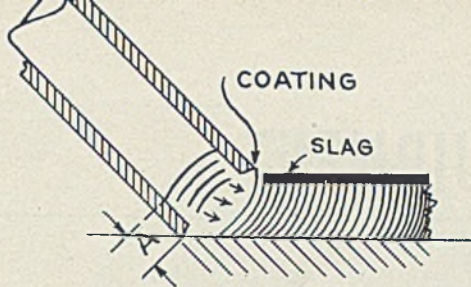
Diagram illustrating how coating maintains correct arc length automatically. Weld metal is protected by coating during deposition, by slag after deposition
